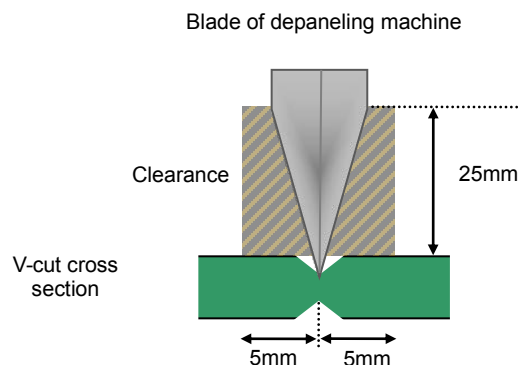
Clearance requirements for the separation of boards with a depaneling machine.
